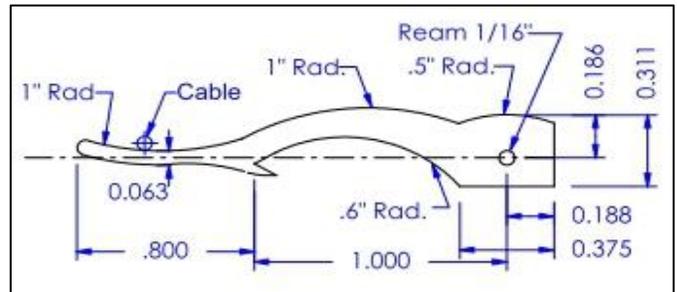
Construction drawing for the fusee iron. The approximate location where the cable contacts the iron is shown in blue. Material is 1/16" mild steel. Note the mounting hole is reamed 1/16" diameter.
